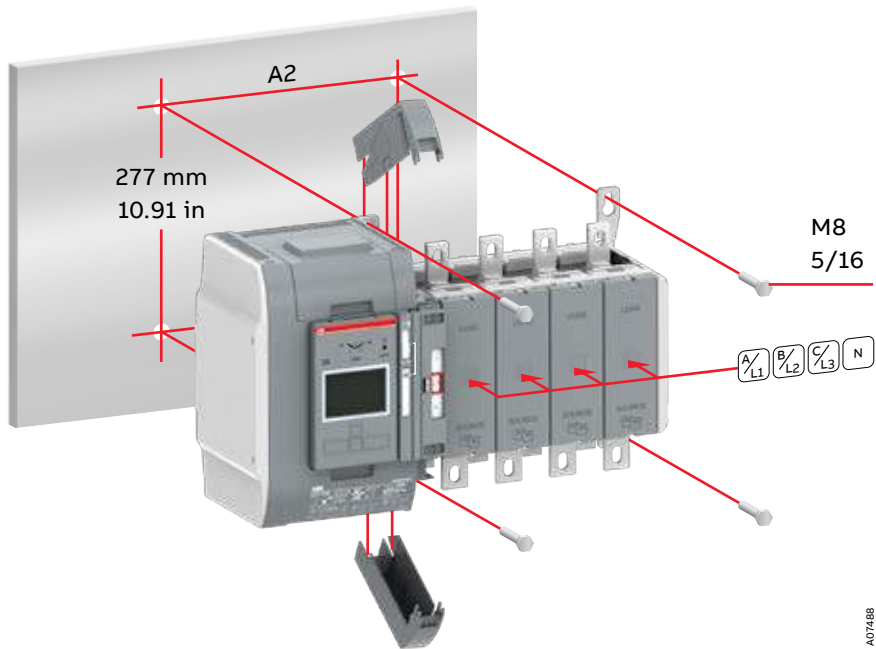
Automatic transfer switches, drilling hole distances / screw-mounting, [mm/in] and attachment of the self-adhesive labels
